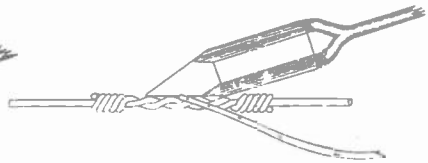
(B) This illustrates the correct way in applying the iron and solder to the joint to be soldered.
